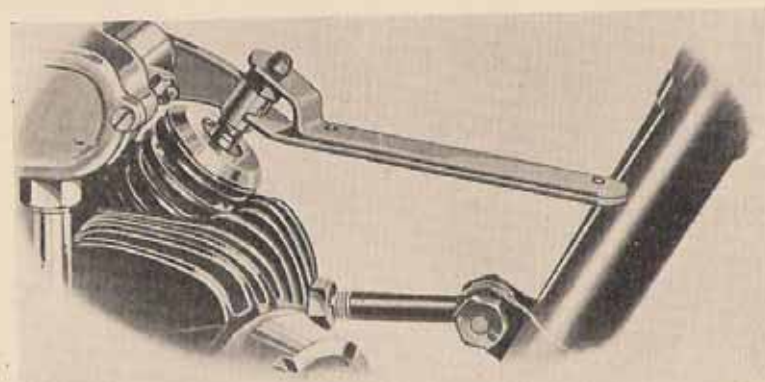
THE A.J.S. TAPPET TUBE EXTRACTOR
